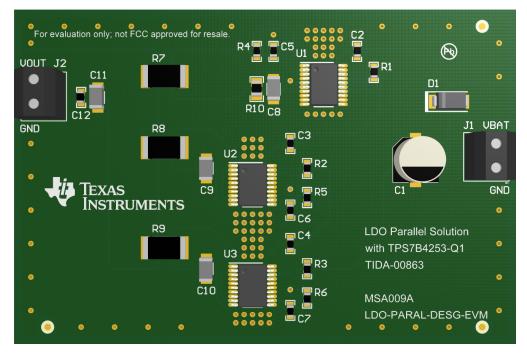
LDO Parallel Design EVM Component Placement (Assembly Top View)
